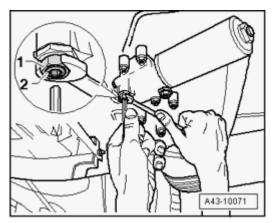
Loosening Lock Nut On Line To Be Checked & Screwing In Shut-Off Screw Until It Is Hand Tight
